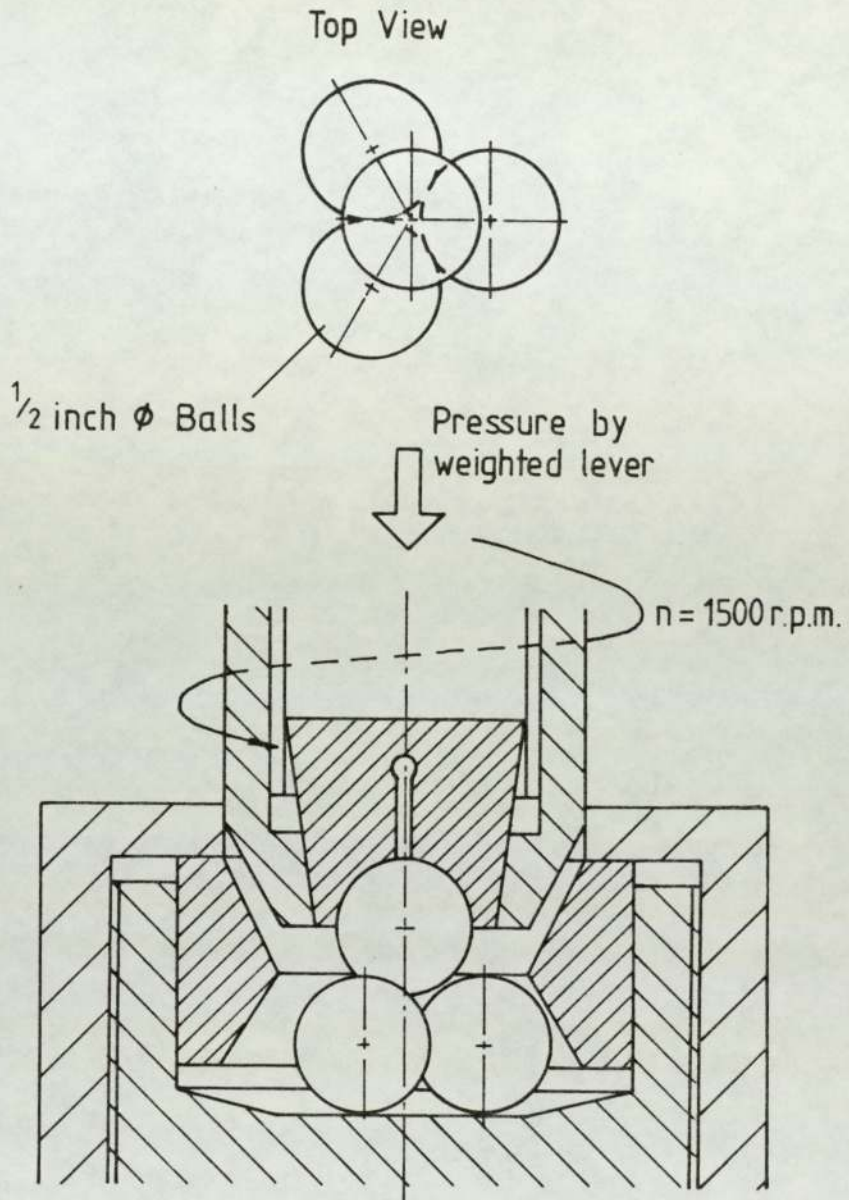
3 Diagram showing details of ball-cup inside the Four-Ball machine.
